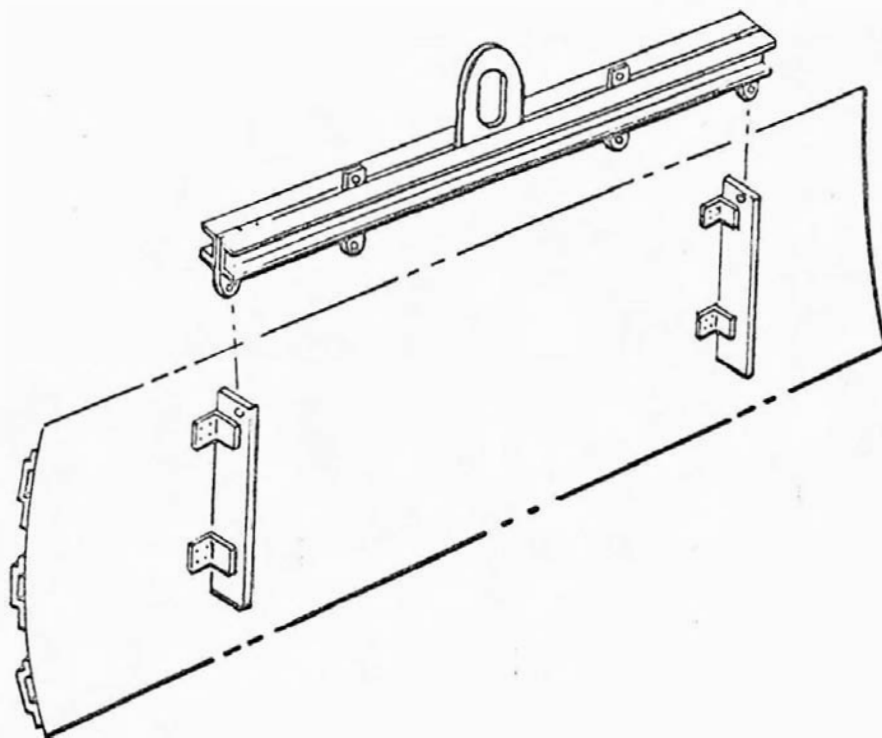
Skin Panel Assemblies Hoisting Tool HT-370-18100
